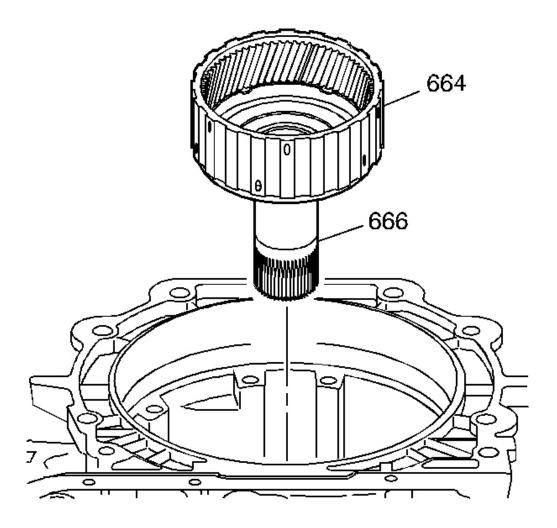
View Of Carrier & Thrust Bearing Assembly Courtesy of GENERAL MOTORS CORP.
